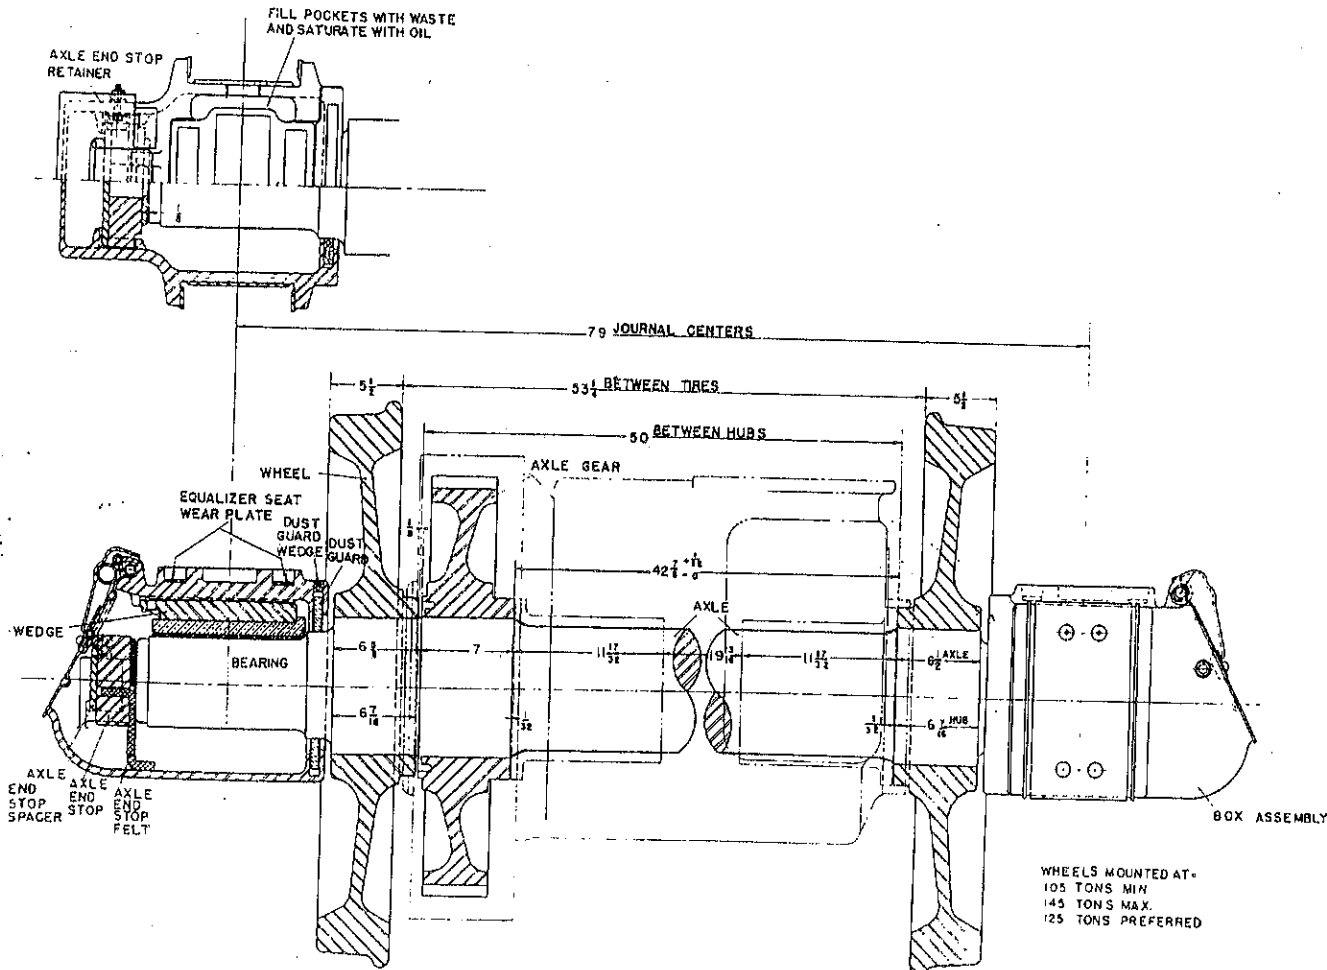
WHEEL, AXLE AND BOX ASSEMBLY
